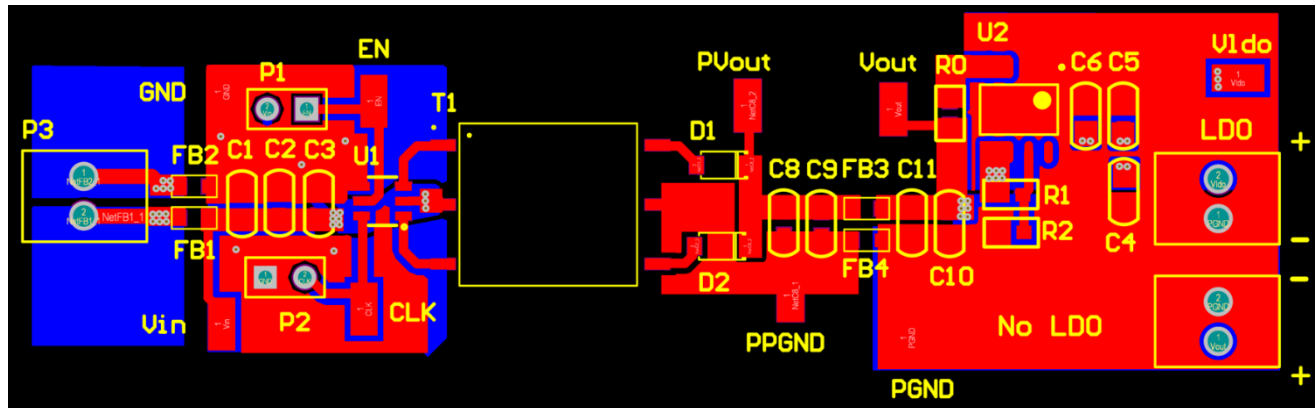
Layout Example of 2-Layer Board (NSIP6055x)
